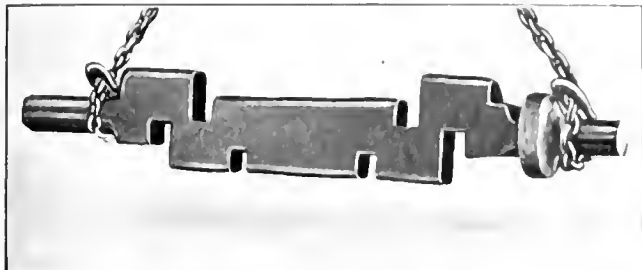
Six-throw Chrome-nickel Crank-shaft, Sawed, Drilled and Blocked out, ready for Rough Turning previous to Twisting
